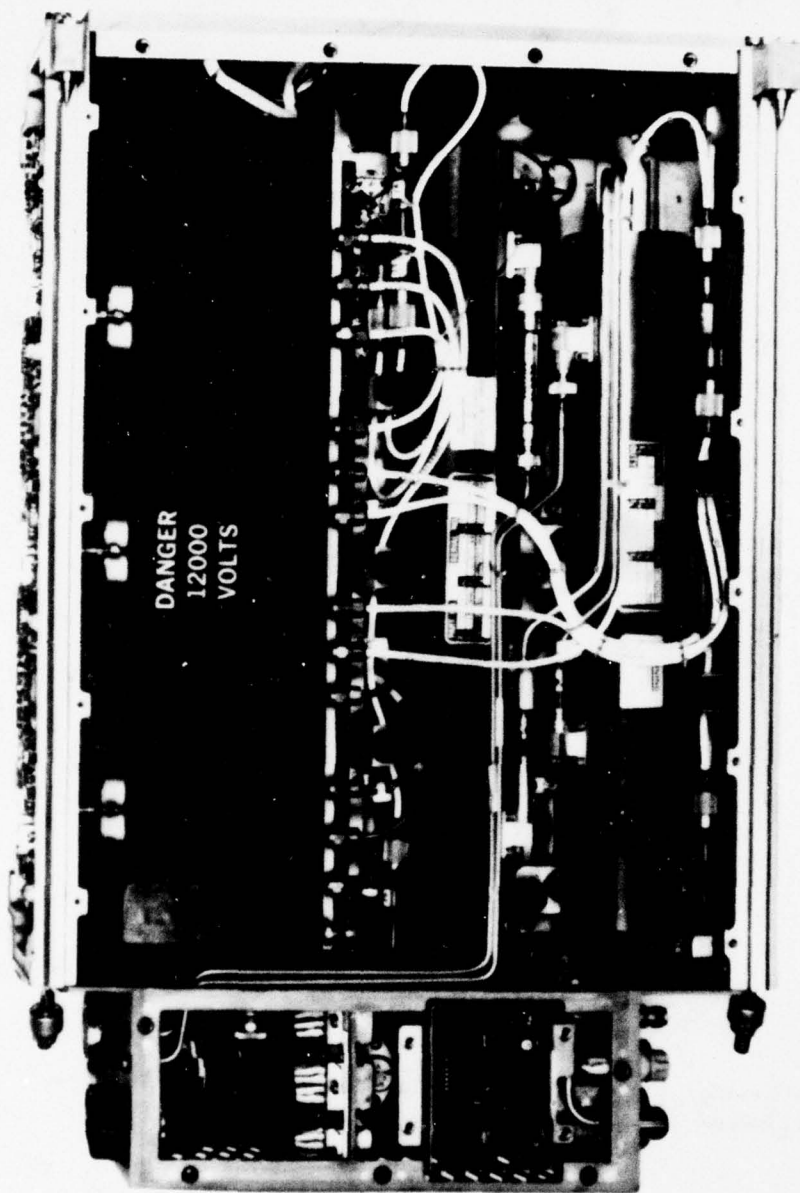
2 Connector/cable assembly installed in users TWT power supply
